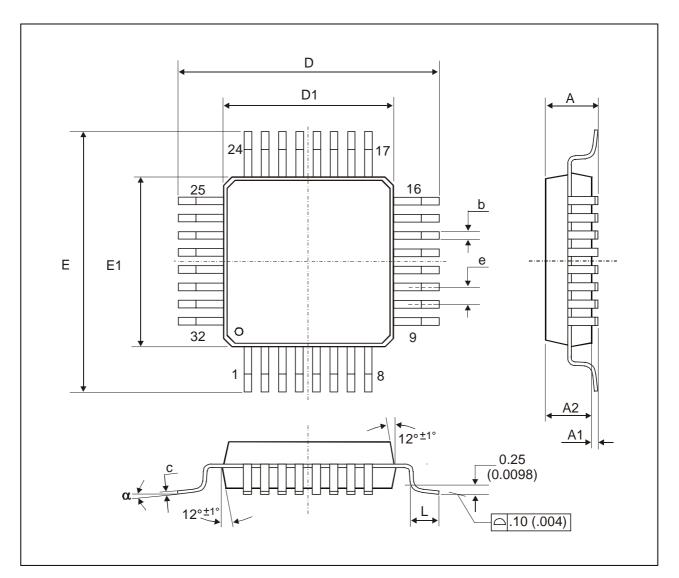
LQFP32 (Low profile Quad Flat Package)
